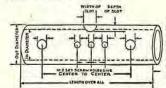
A handy diagram to copy and fill in what is needed when ordering special piston pins. (By courtesy of Heald Machine Co., manufacturer of cylinder grinding machinles, Worcester, Mass.)
